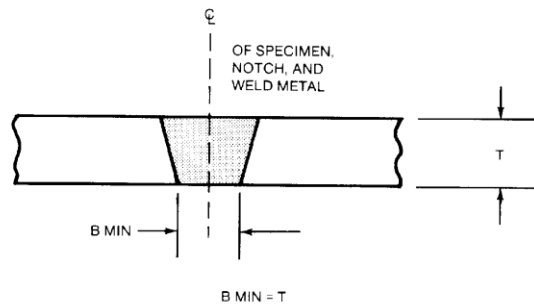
Minimum Width of Weld Metal for a Weld-Metal Fracture Toughness Specimen
